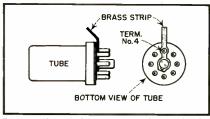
Attach brass strip to base of tube for testing and alignment.
